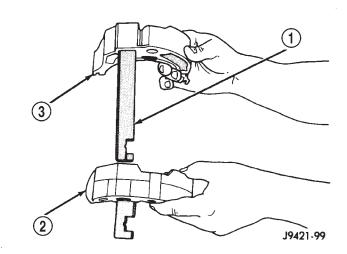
Assembling 1-2 And Fifth-Reverse Shift
